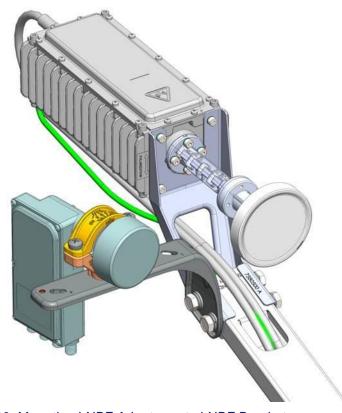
Mounting LNBF Adapter onto LNBF Bracket
